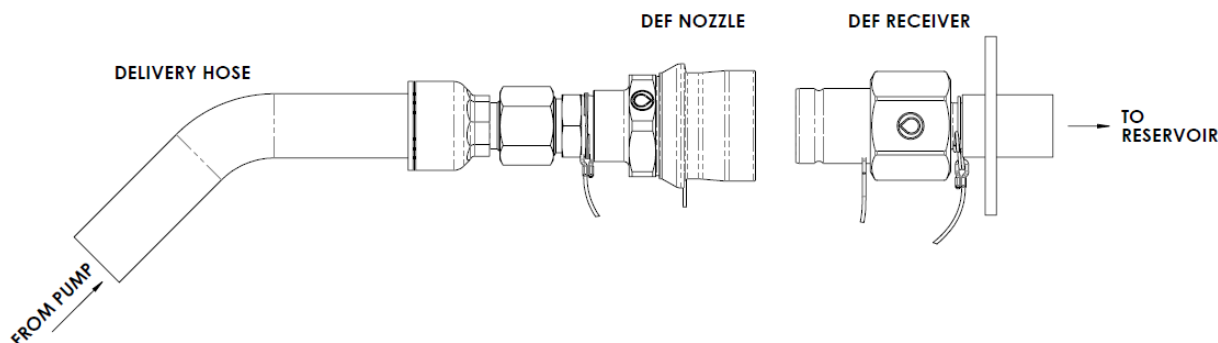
Example of a fluid transfer system using the DEF Coupling
